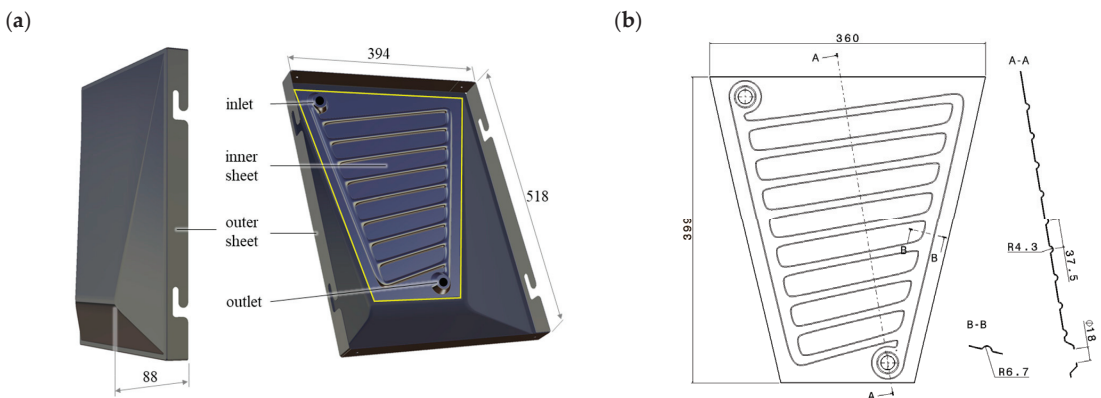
Principal collector design: (a) CAD model of the assembled collector and (b) drawing of the inner sheet with the channel structure.
